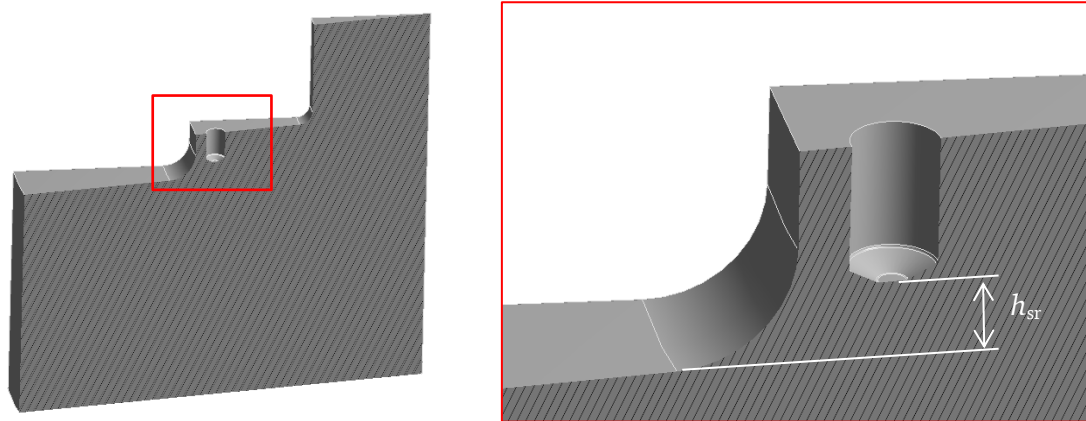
Balancing plane on the flywheel rotor with balancing holes, where h_{sr} is the distance between the screw hole bottom and the flywheel body, modeled in *ANSYS Workbench
